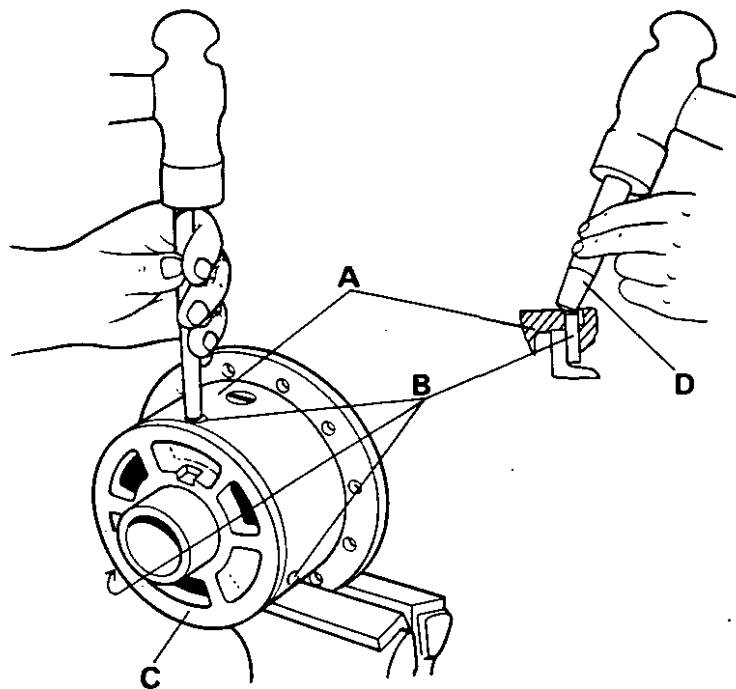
PEENING OVER DIFFERENTIAL CAGE CAP LOCKING PINS
